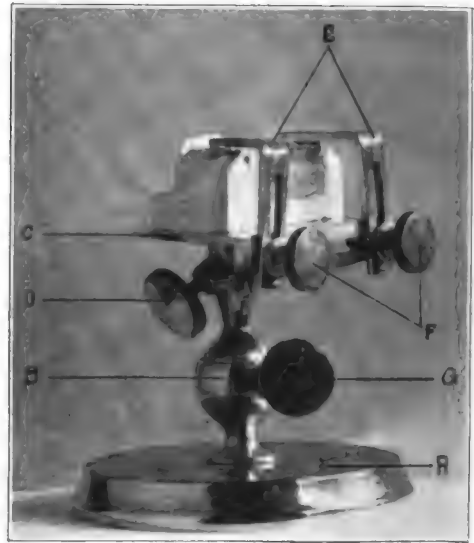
The new soldering stand. Parts cast of bronze with exception of base.
